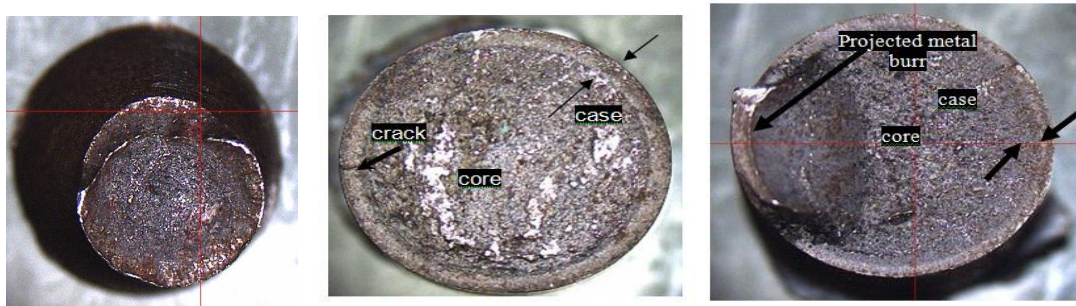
Macro images of As received, Carburized and carbonitrided tensile fractured specimen
